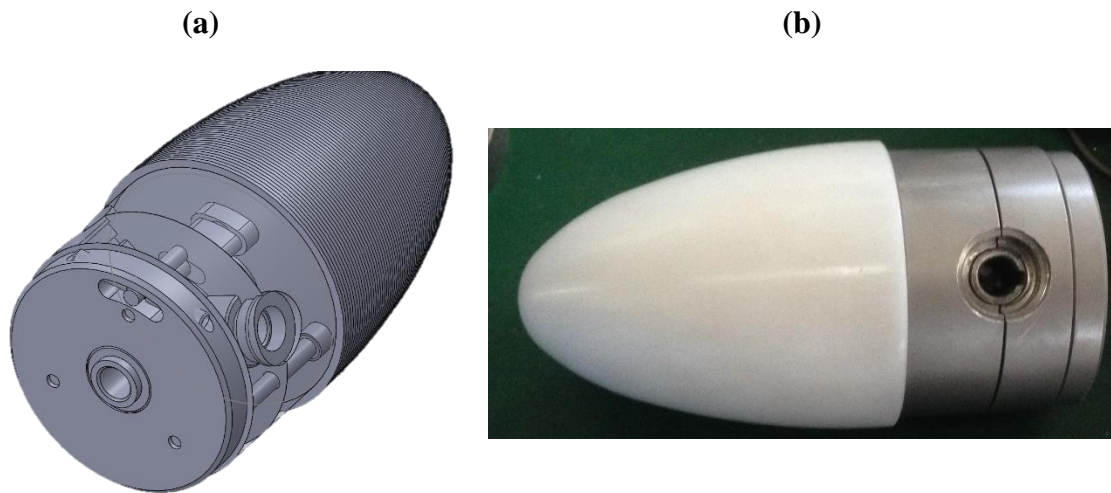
(a) CAD Design of Rotor Hub and Cone and (b) Fabricated Cone and Rotor Hub
